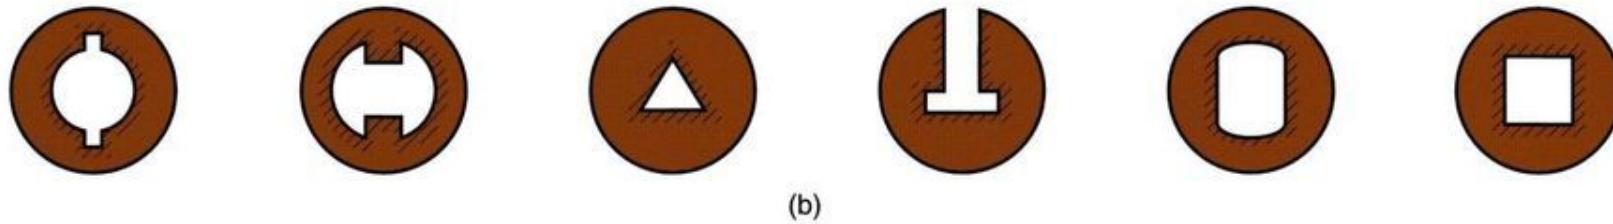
Work shapes that can be cut by internal broaching; cross-hatching indicates the surfaces broached.
